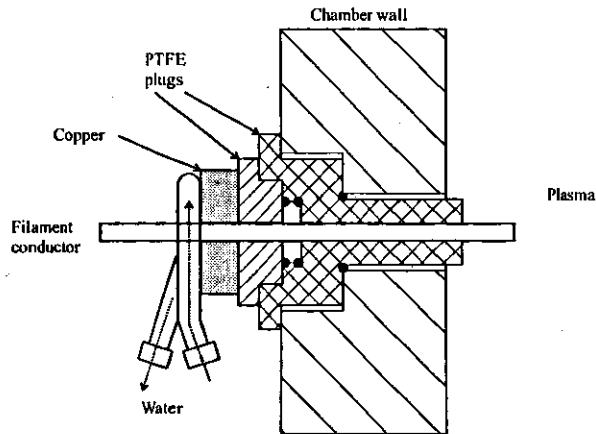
Cross-sectional side view of the filament electrodes showing the placement of the copper cooling collar and vacuum seal O-rings. Cooling is provided by water circulated through the attached copper pipe.
